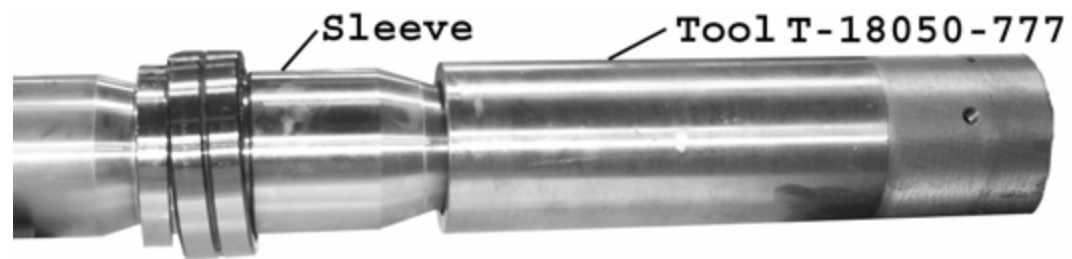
Use [Special Tool T-18050-777](#) to Seat the Sleeve Against the Bearing
